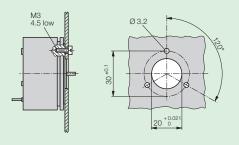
Drilling plan for fixing with 3 cheesehead screws M3.
